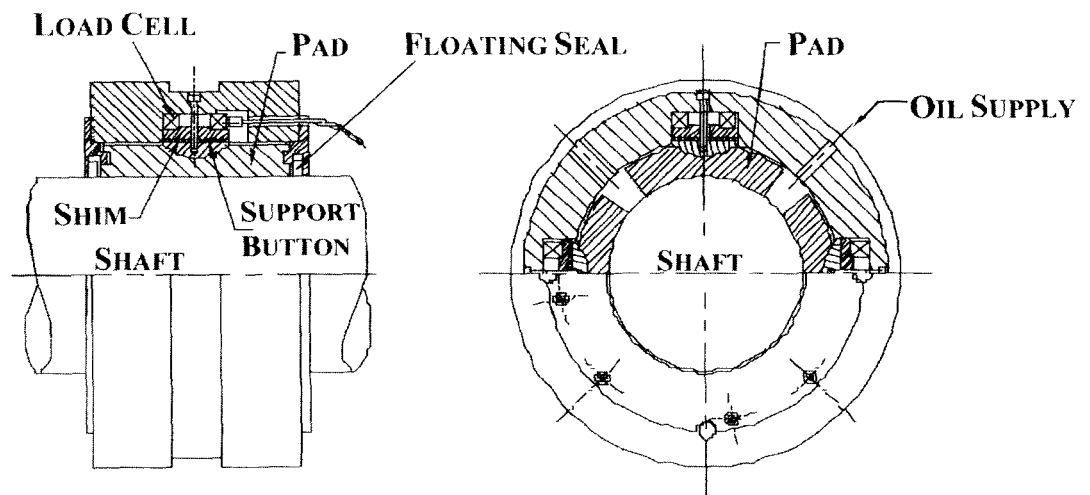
PART SECTION OF TILTING PAD BEARING SHOWING LOAD DYNAMOMETER
